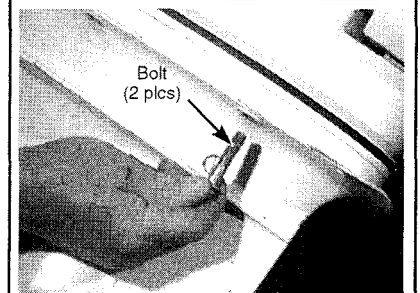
With the gearcase almost flush, thread and slowly tighten the bolts
